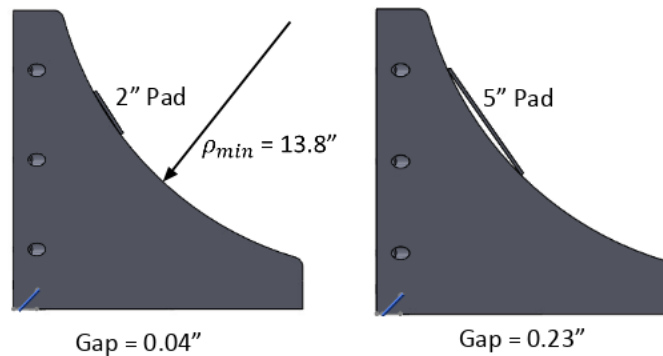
Left: Small gap between surface and small diameter sanding pad Right: Large gap between surface and large diameter sanding pad
